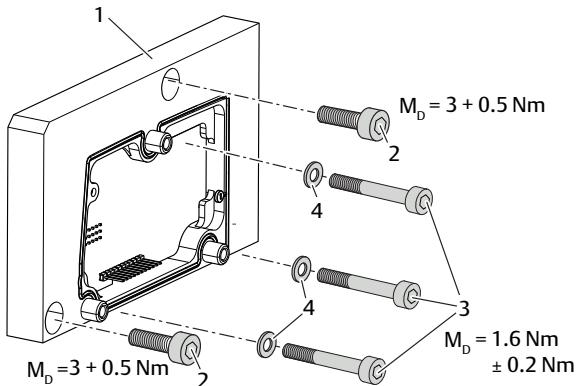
Mount the adapter module AES-B-design to the bus coupler
